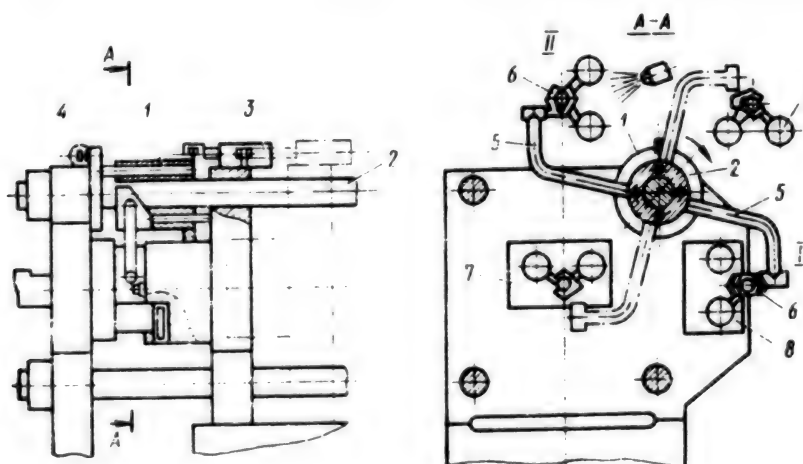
Diagram of Robotized Pressure Die Casting Complex With Combination of Operation of Finishing the Castings and of the Operating Cycle of the Machine
